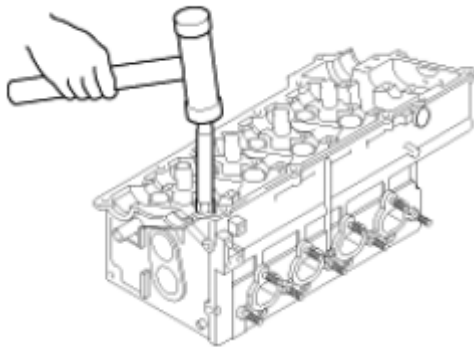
Pushing Oil Seal Using SST (09222 - 22001)
